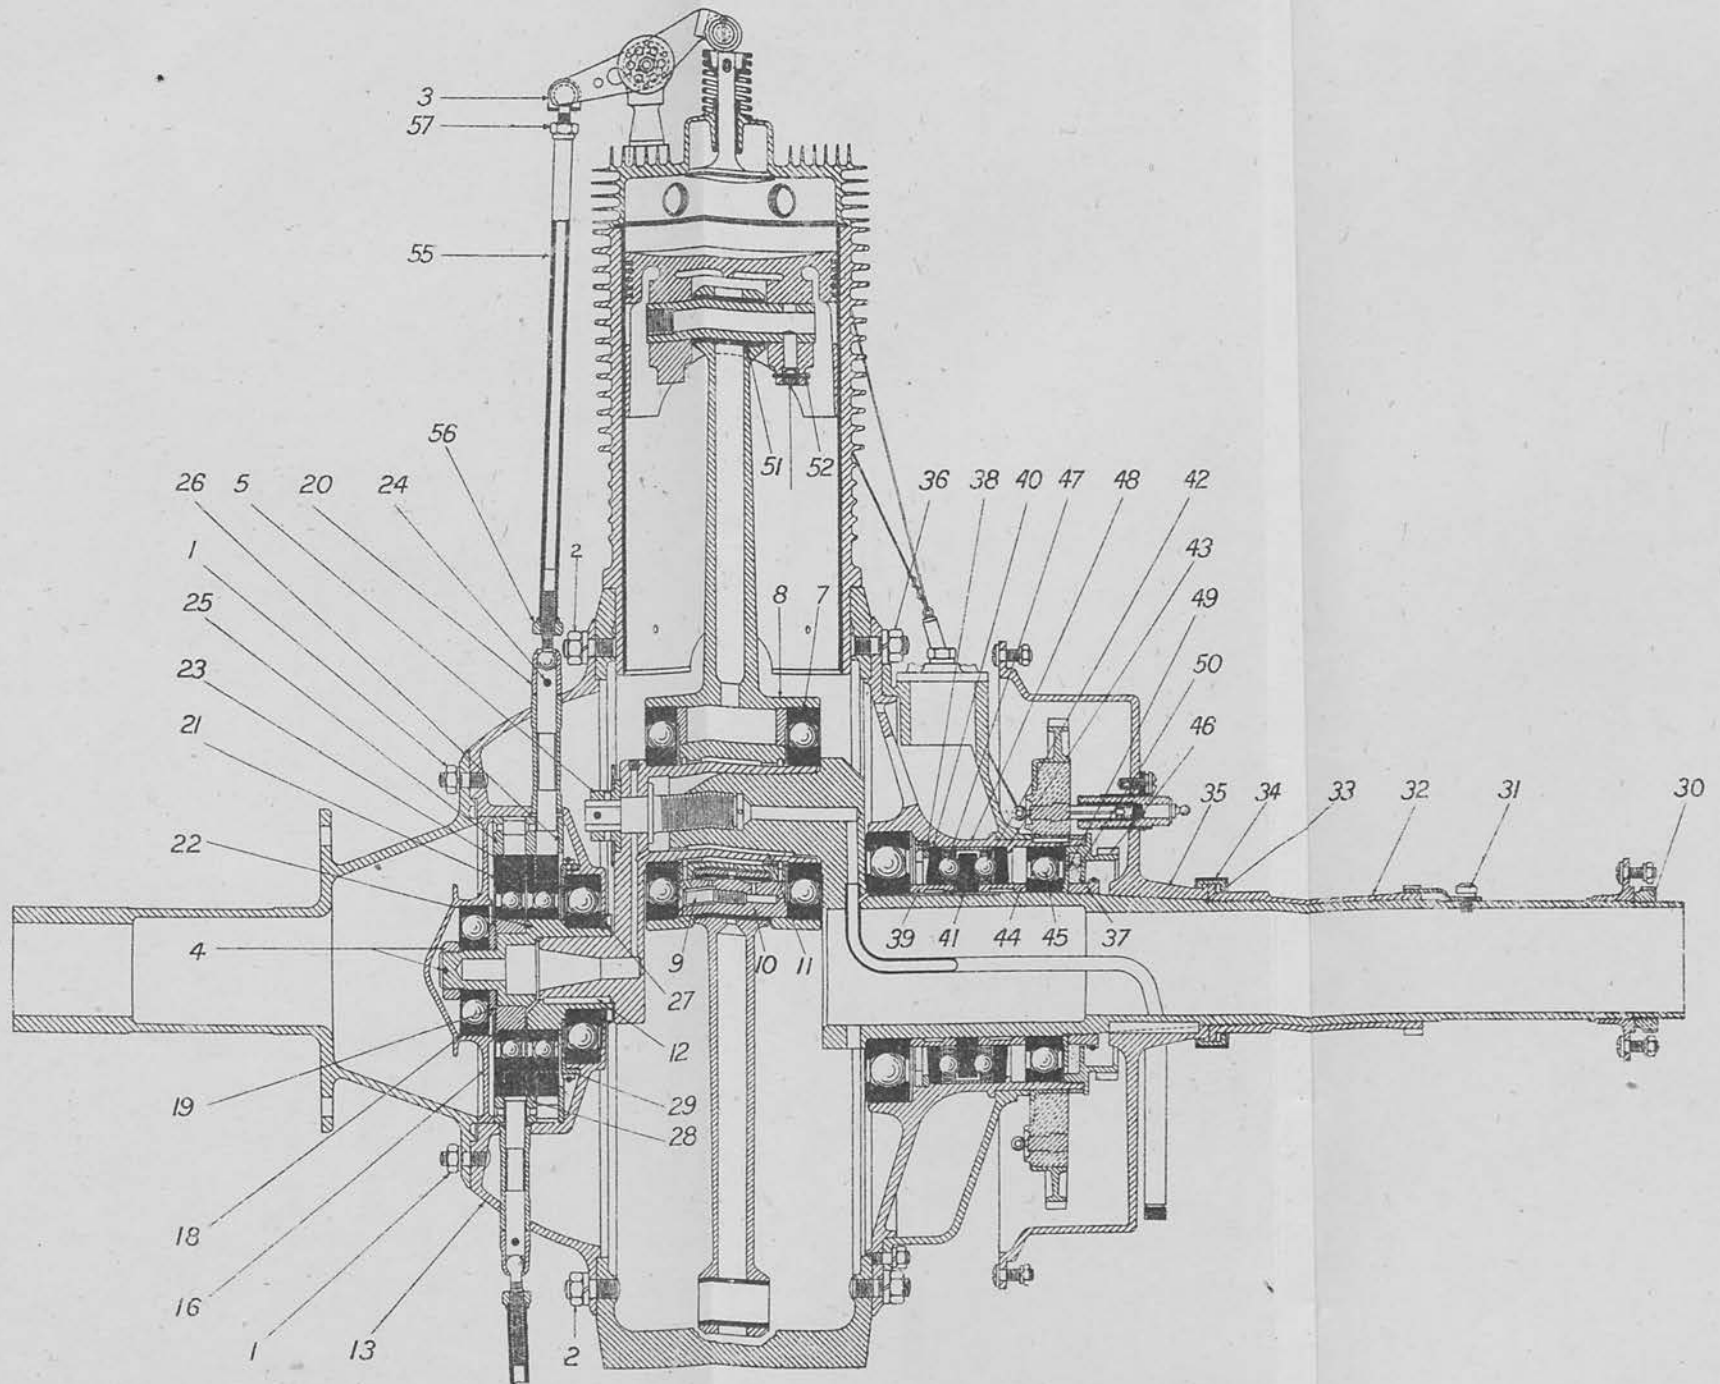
GENERAL ARRANGEMENT OF ENGINE.
